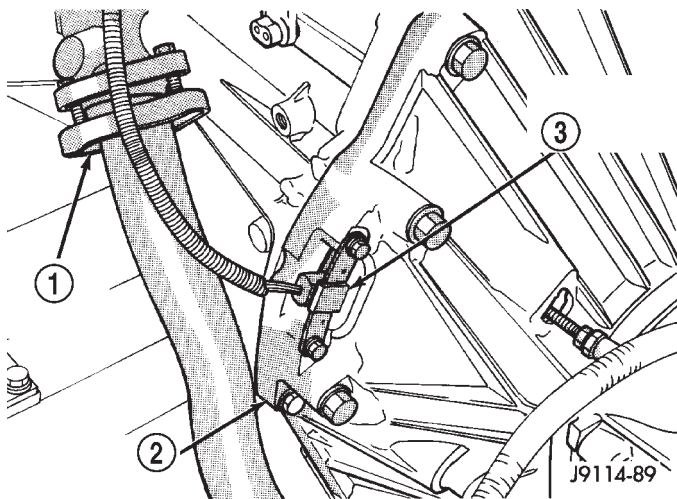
Crankshaft Position Sensor - 2.5L Engine
